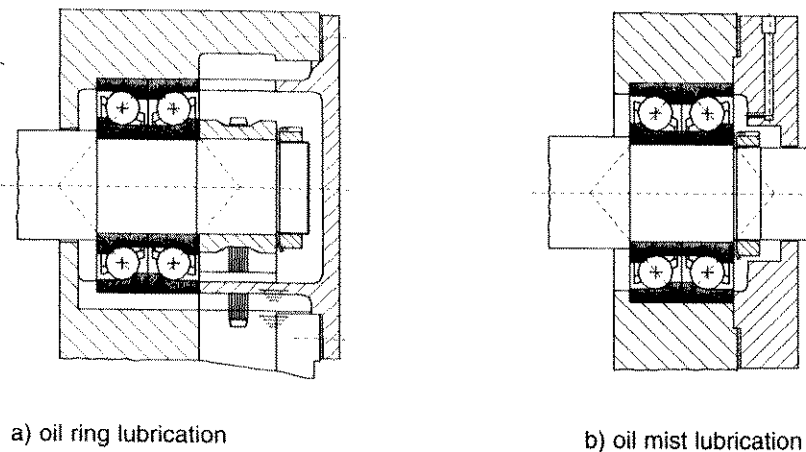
Oil ring and oil mist lubrication of roller bearings
